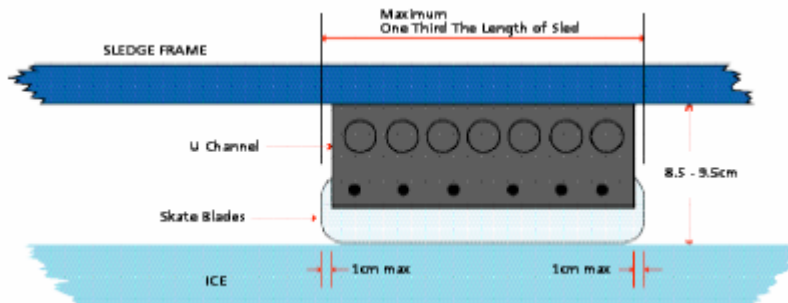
SLED BLADE ASSEMBLY SIDE VIEW
